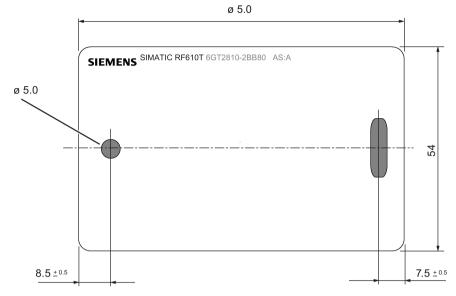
Dimensional drawing of SIMATIC RF610T
